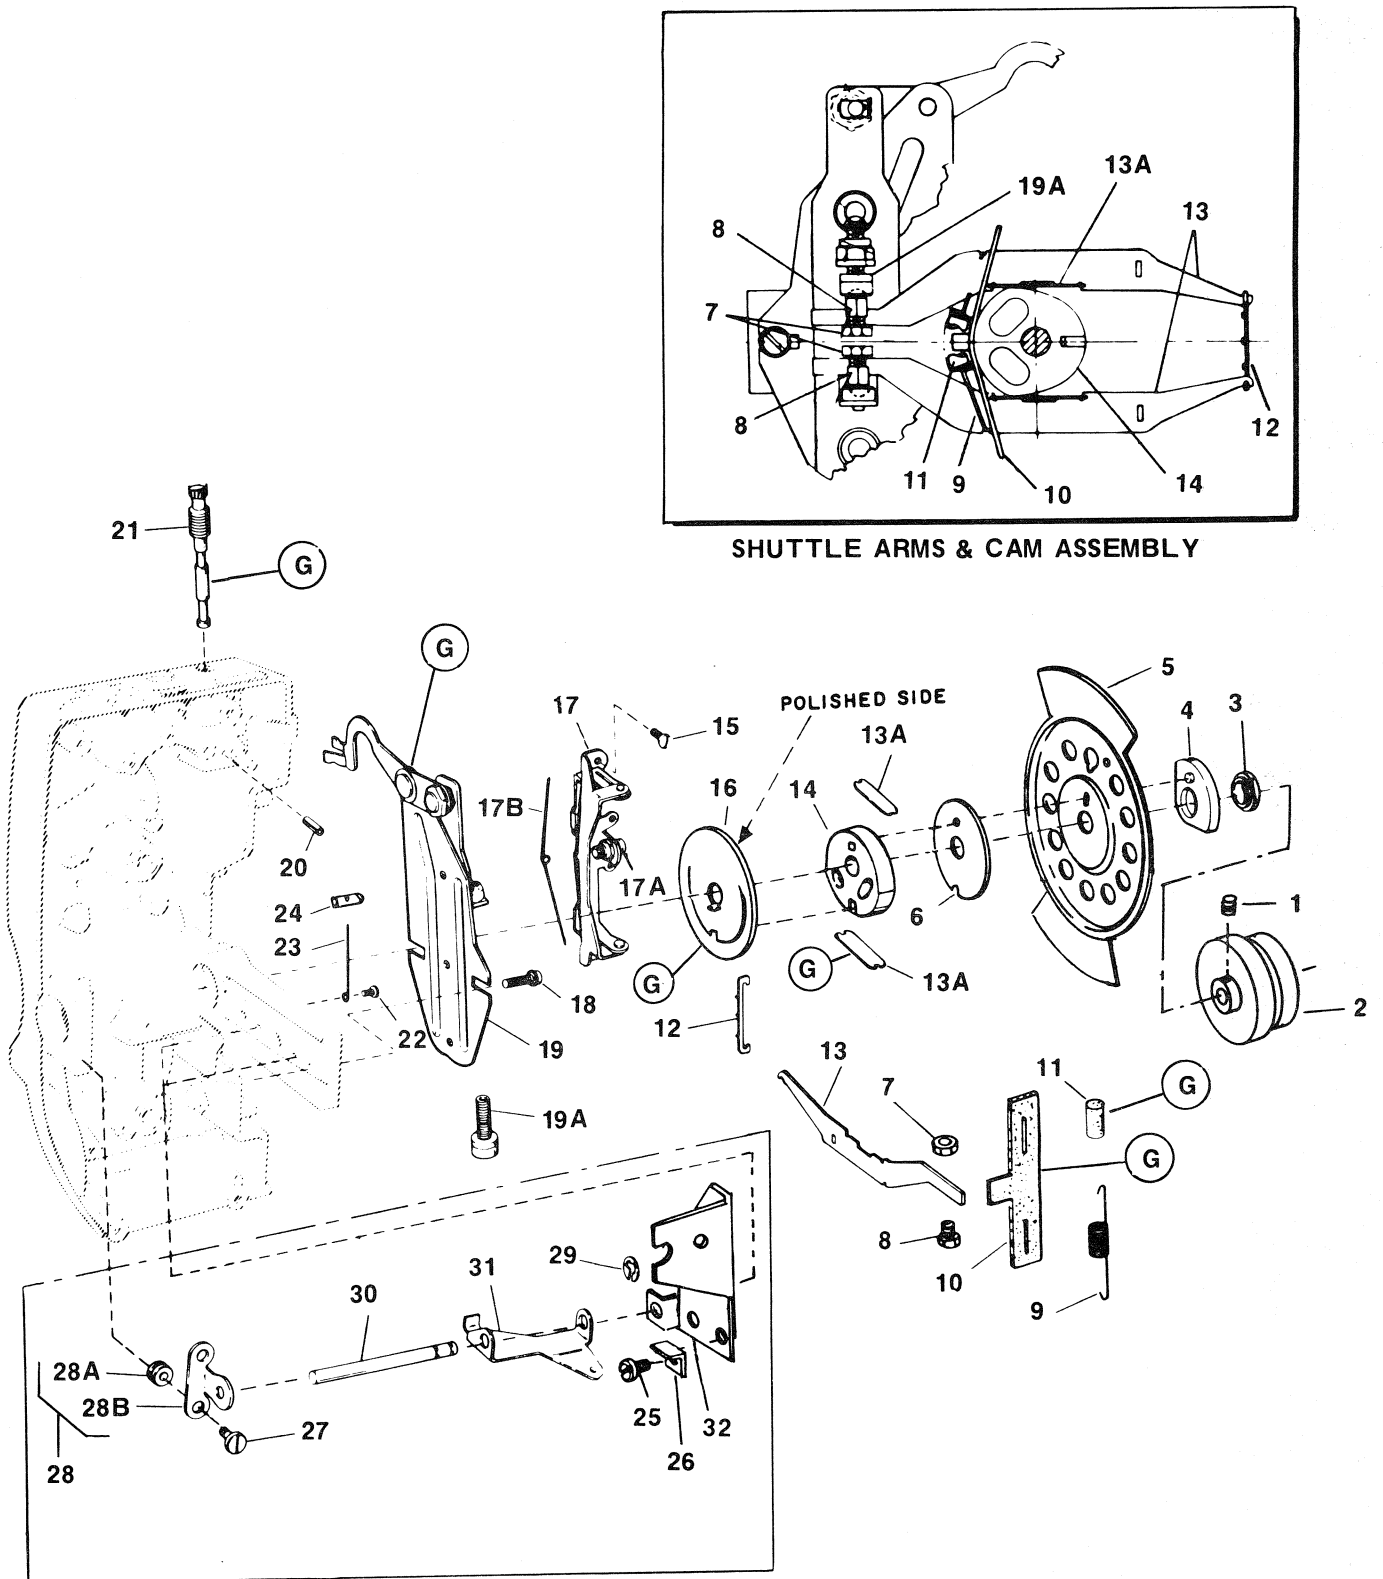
MECHANISM ASSEMBLY VIEW IV
